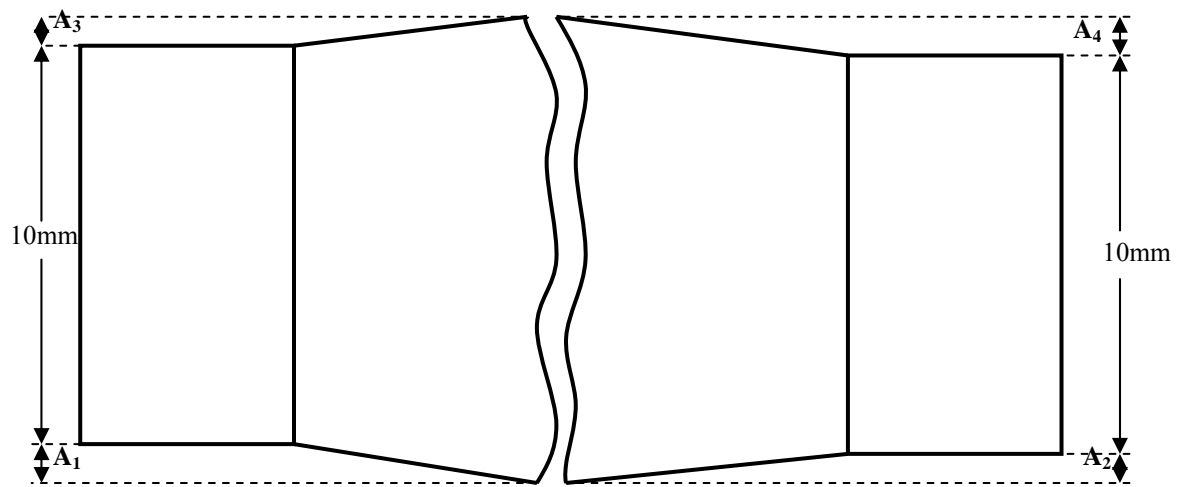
Sketch of lateral expansion measurement using fractured Charpy impact specimen halves [60].
